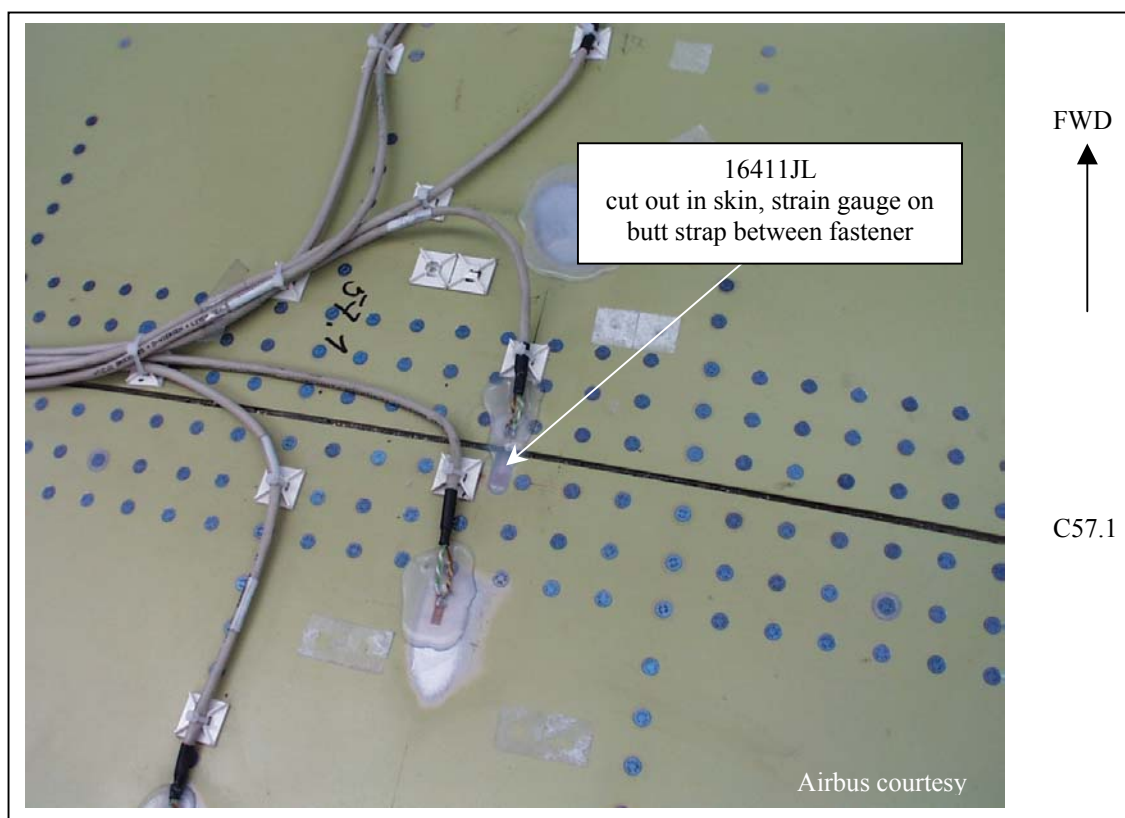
Detailed top view on fuselage, strain gauge 1611JL at critical butt strap location, cut out milled in the skin for access to the butt strap mating surface
